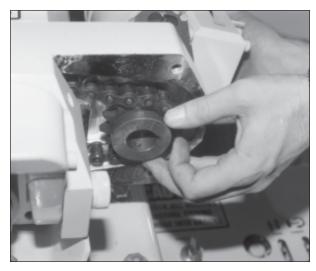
Remove 12-tooth sprocket from hydraulic motor shaft.
